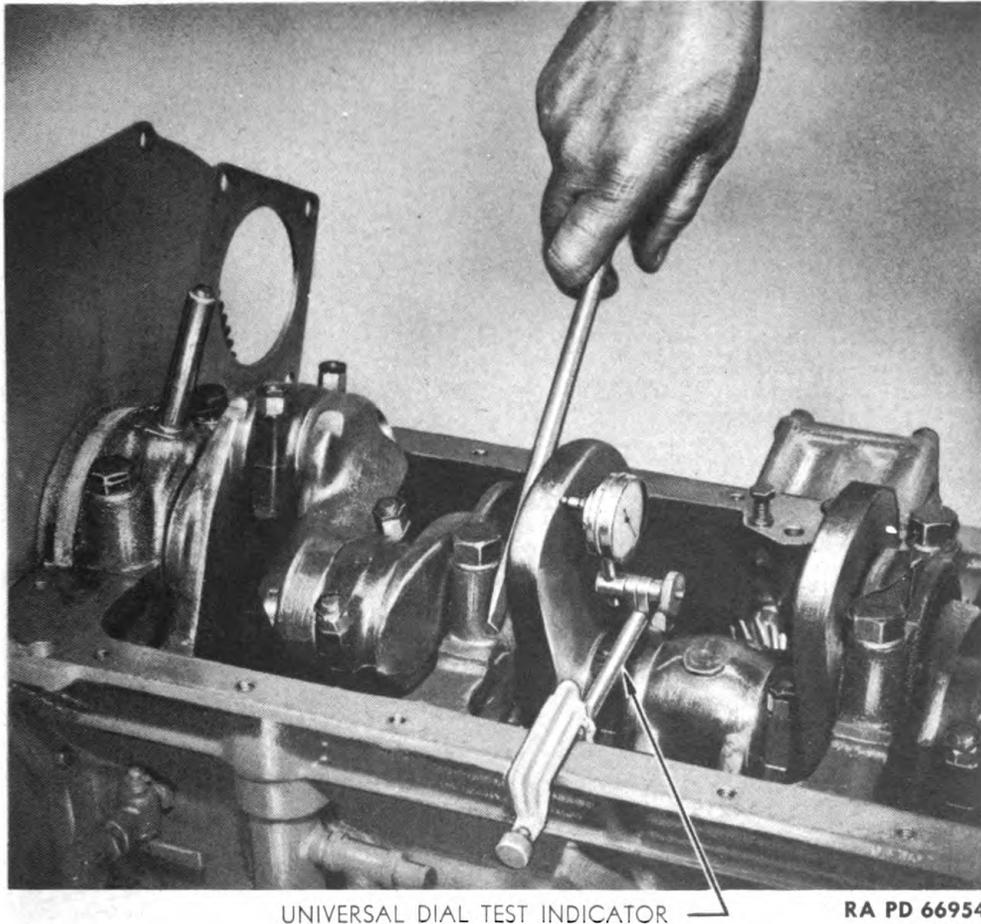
Checking Spacer and Plate Governing Camshaft End Play
